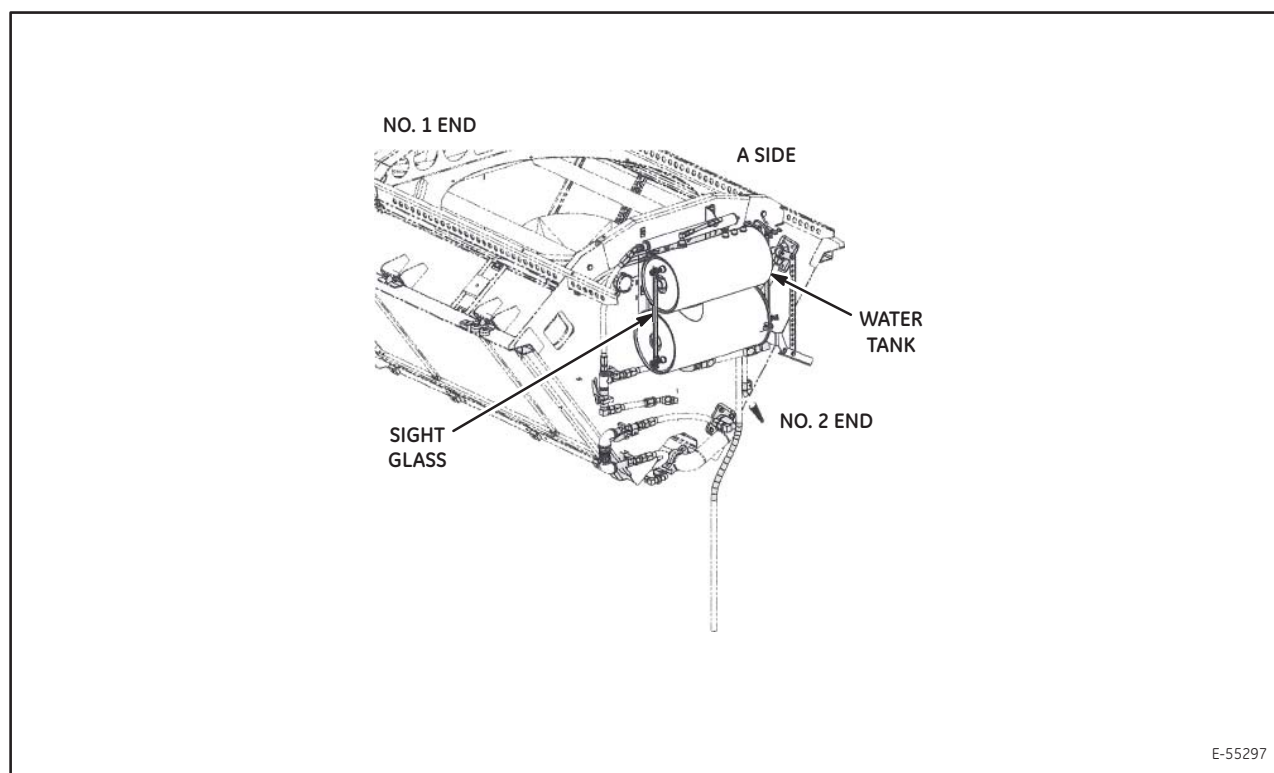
Location of Water Tank and Sight Glass (PH37ACai Unit Shown)
